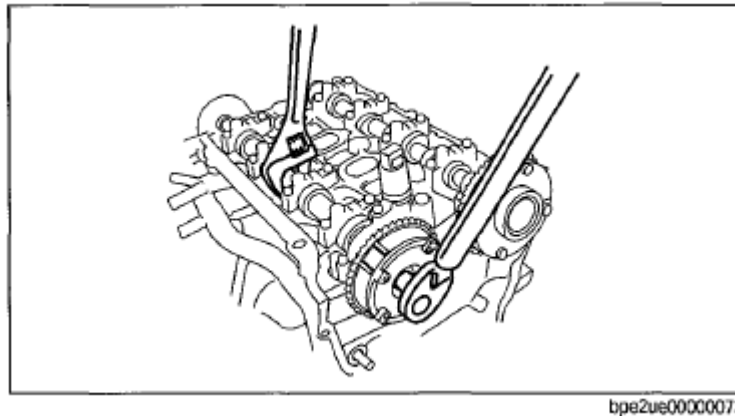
Locating Bolts And RH Camshaft Phaser And Sprocket
